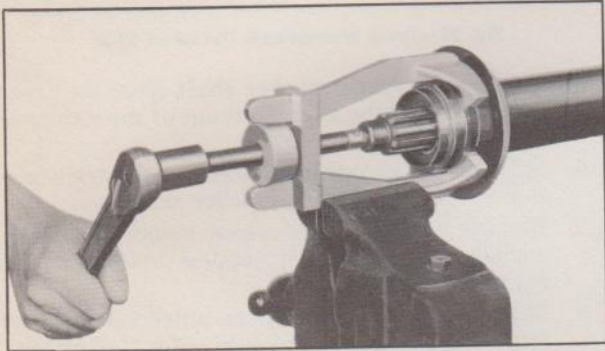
Removing Propeller Shaft Intermediate Bearing
